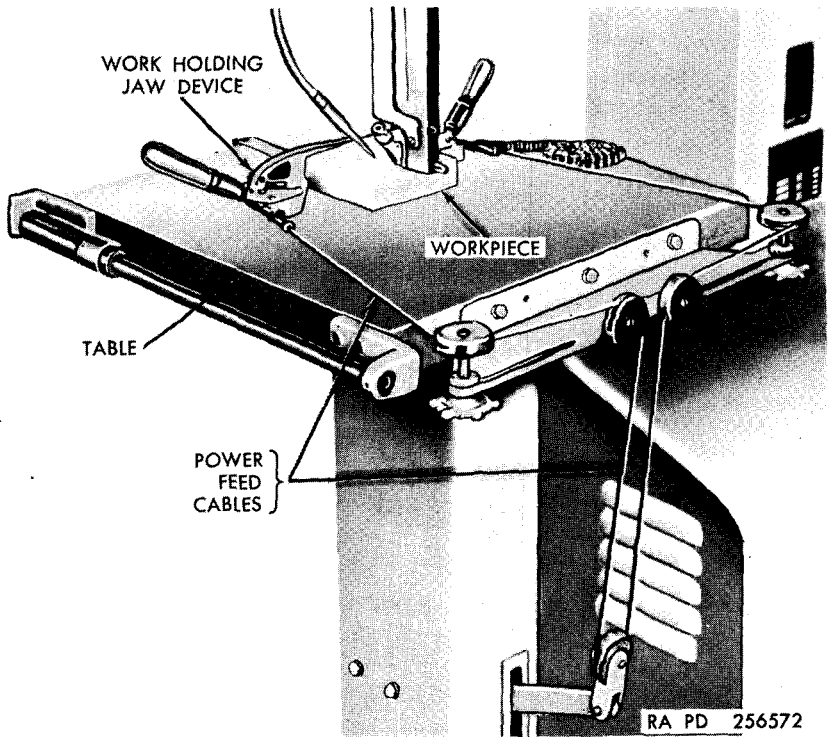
Work holding jaw device used for straight-line sawing with power feed.
